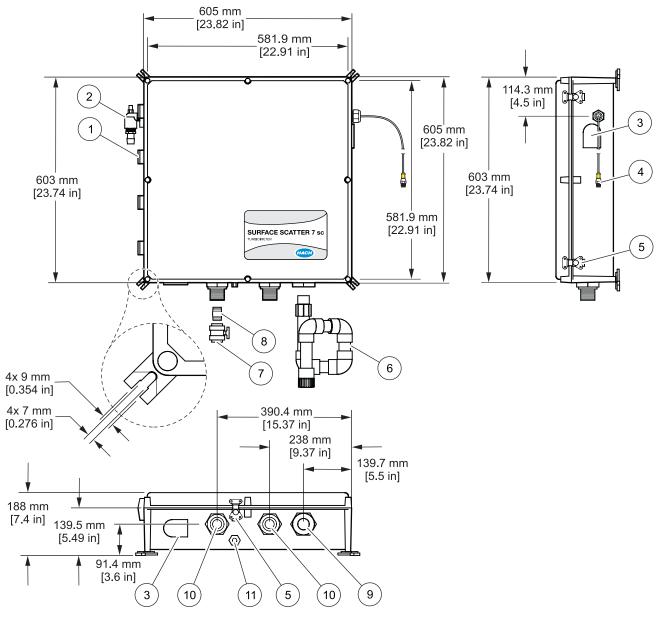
SS7 sc and SS7 sc-HST installation drawing
